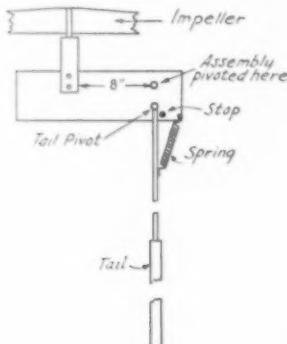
RIG FOR AUTOMATICALLY TURNING THE IMPELLER OF A WIND-DRIVEN BATTERY CHARGER OUT OF A HIGH WIND
